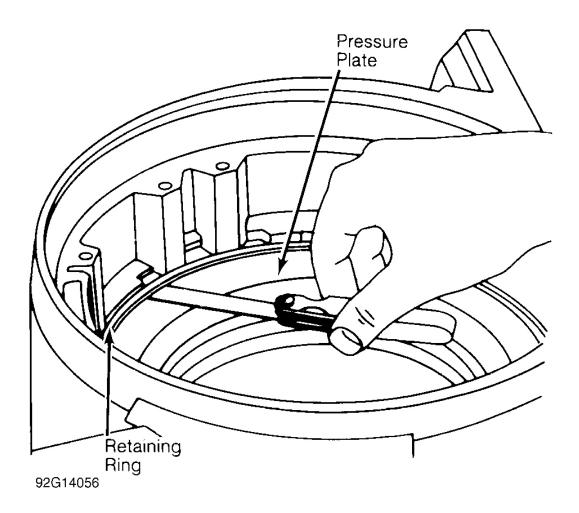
Measuring Reverse Clutch Clearance Courtesy of FORD MOTOR CO.
